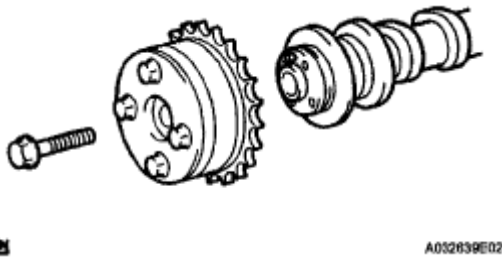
Identifying Camshaft Timing Gear And Bolt
